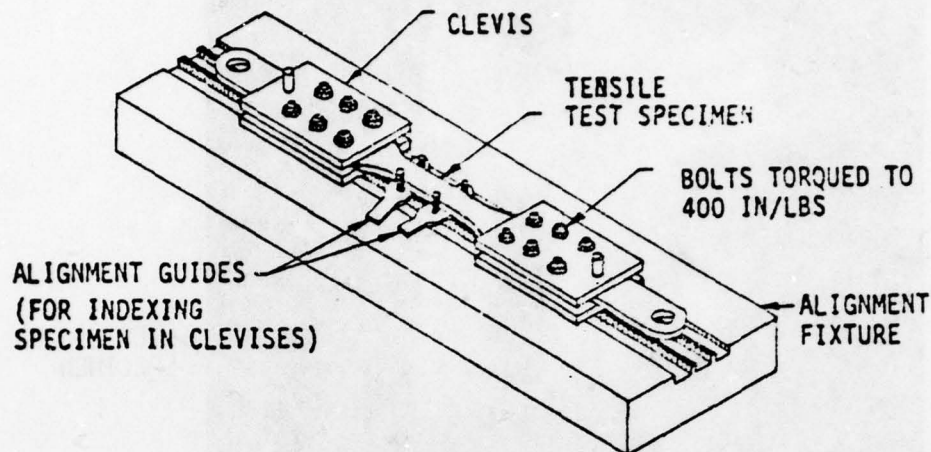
Tensile Test Specimen Indexing and Alignment Fixture.
